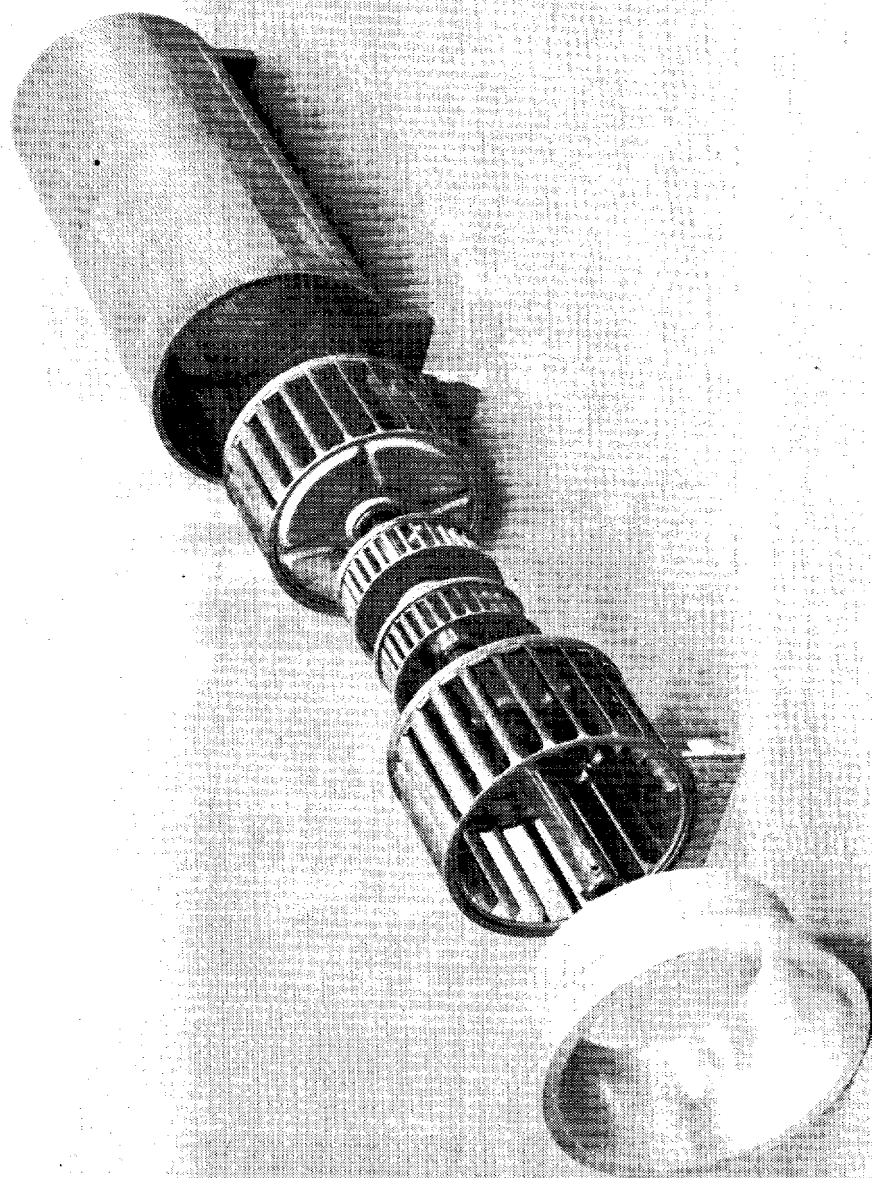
Inlet Fairing and Blower Wheel Have Been Moved Out of Cage to Show Relative Mounting Positions
